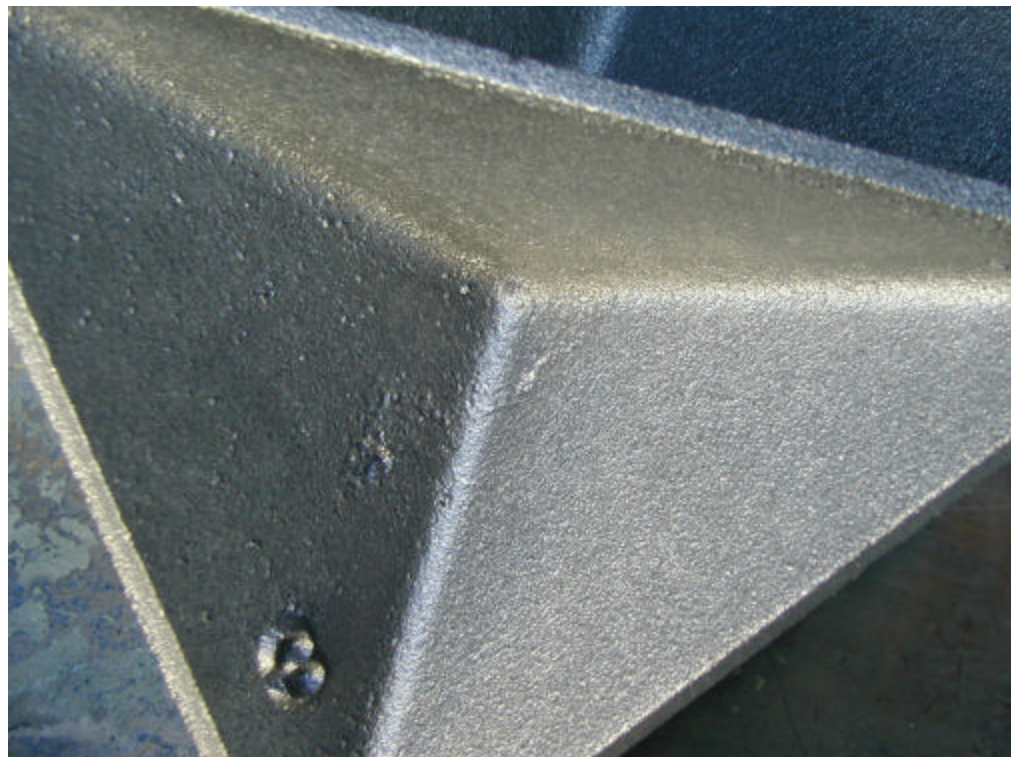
Mold FN004 cavity 3 casting ranked 9 of 9
